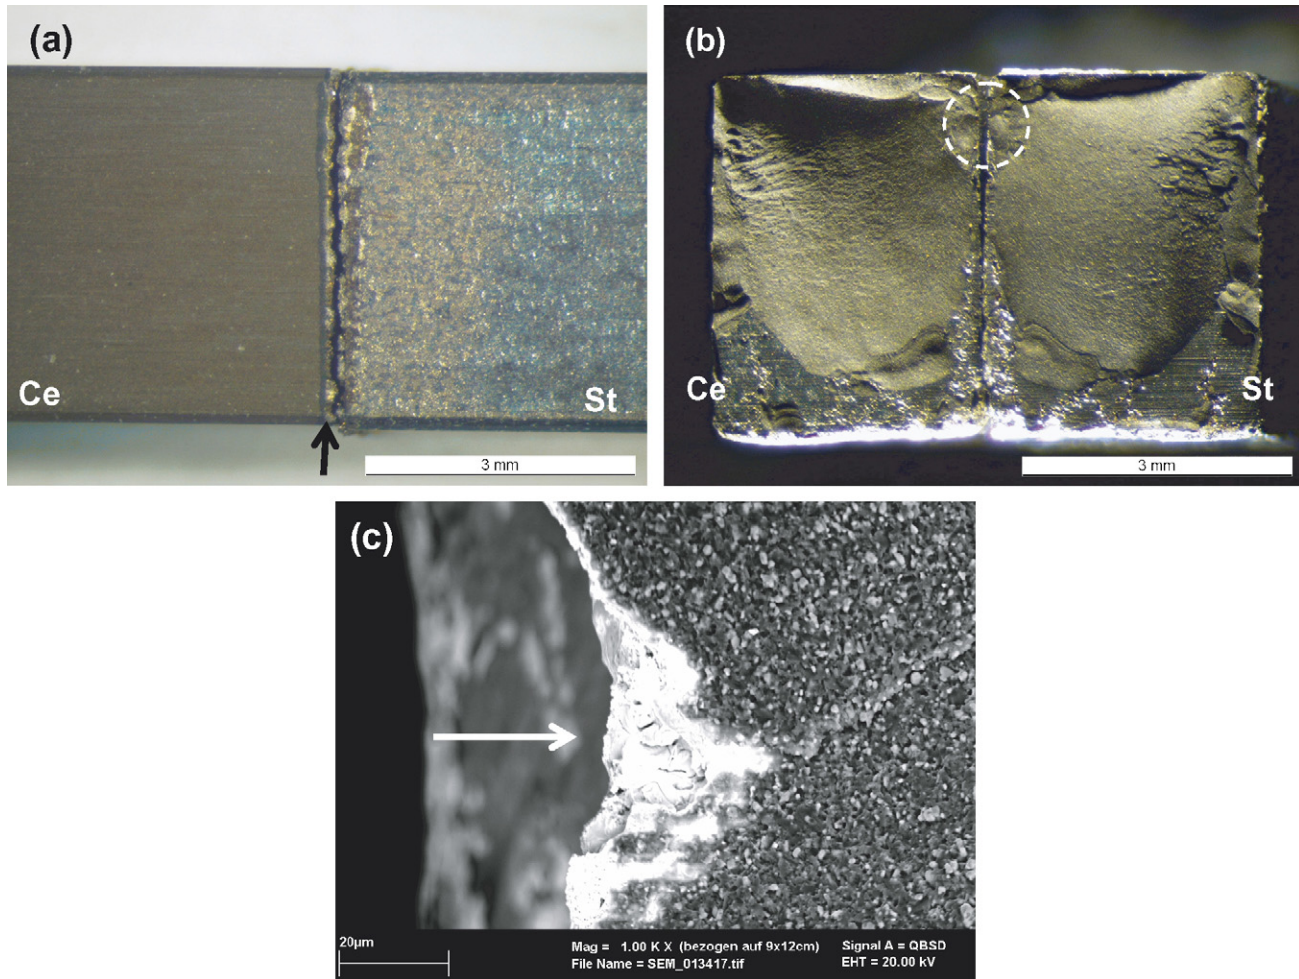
Fractography of ceramic-to-steel joint: (a) side view of the straight crack path in the ceramic of the ceramic-to-steel joint with Incusil ABA,  $\sigma_f = 282$  MPa; (b) view of the two main fracture surfaces from (a) showing that fracture occurs through the ceramic partner, the fracture origin is highlighted and (c) close up view showing the fracture origin is a pore which was infiltrated by the braze filler alloy.
